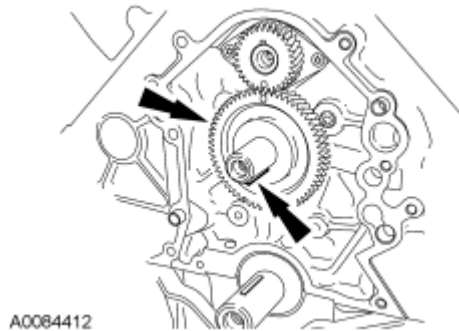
Locating Engine Balance Shaft Drive Gear & Camshaft Key
